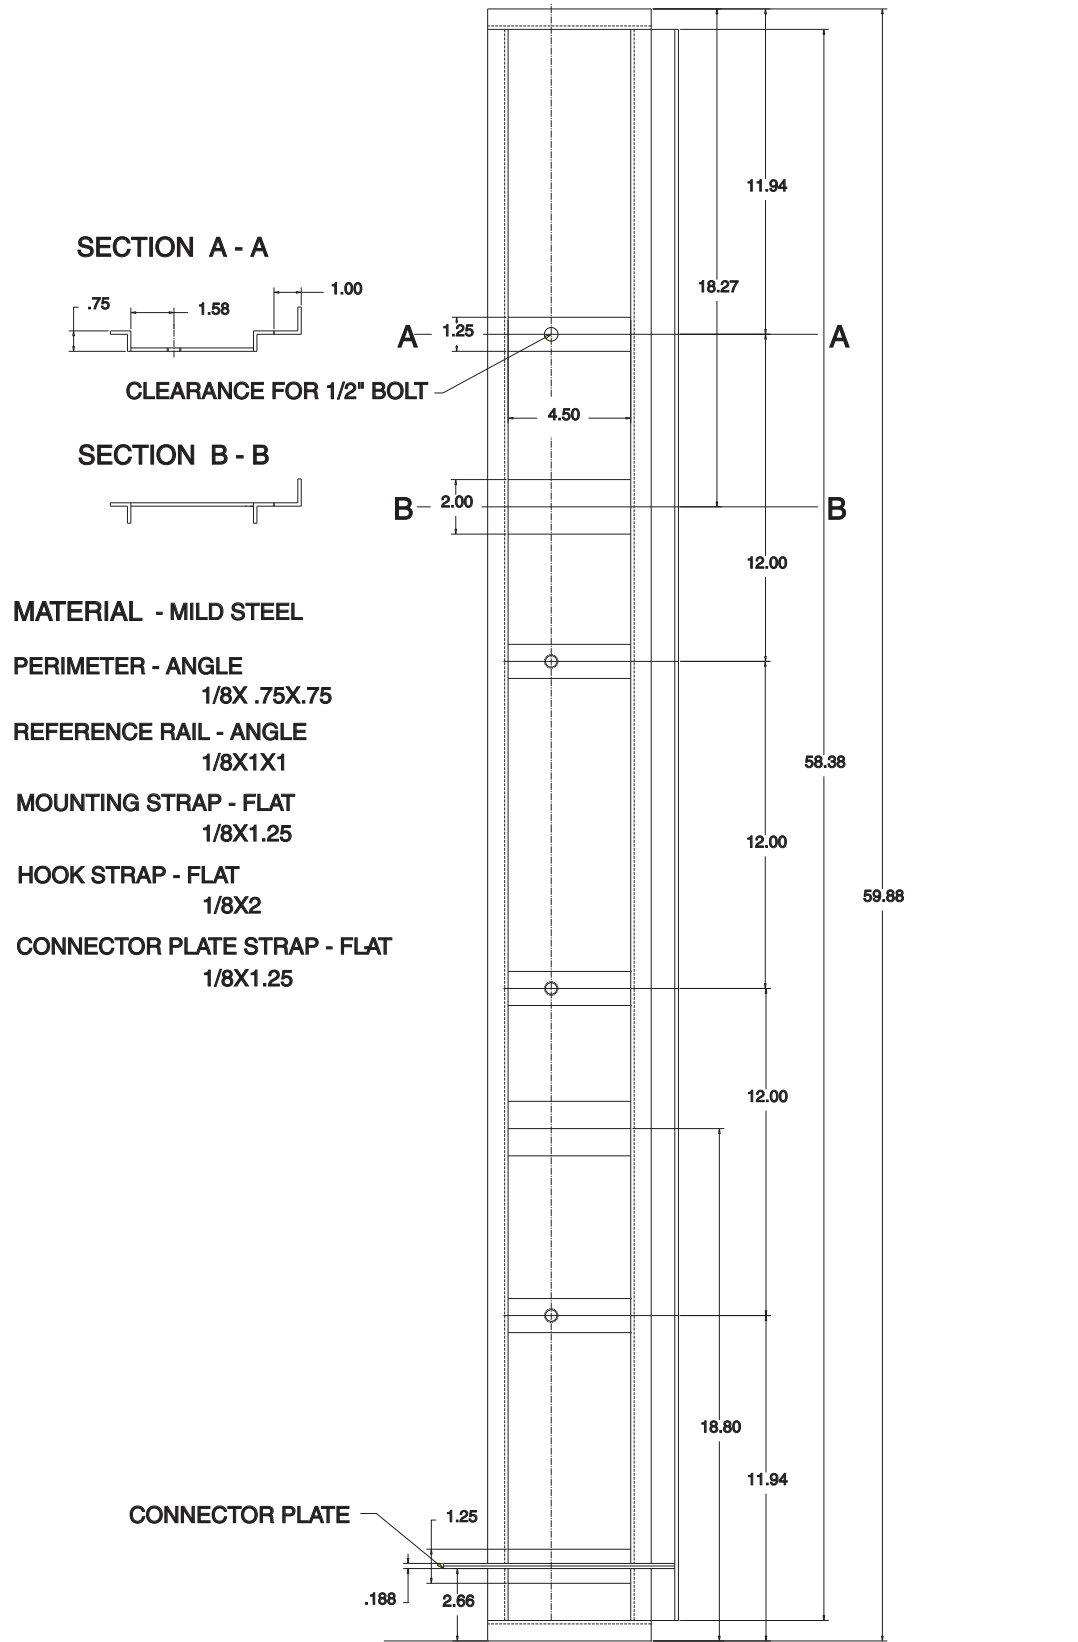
(continued). D. Drawing of bolt pattern for wellhead instrument bay left web, used for temporary bolting of the mounting frame to the wellhead for welding. (Continued on next page.)
